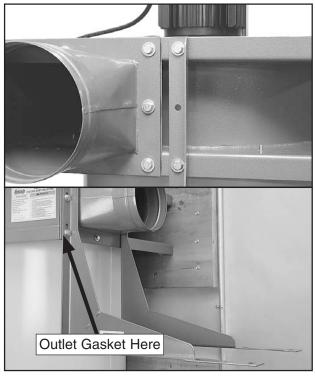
Model G0441 and G0443 outlet port and filter L-braces installed.
